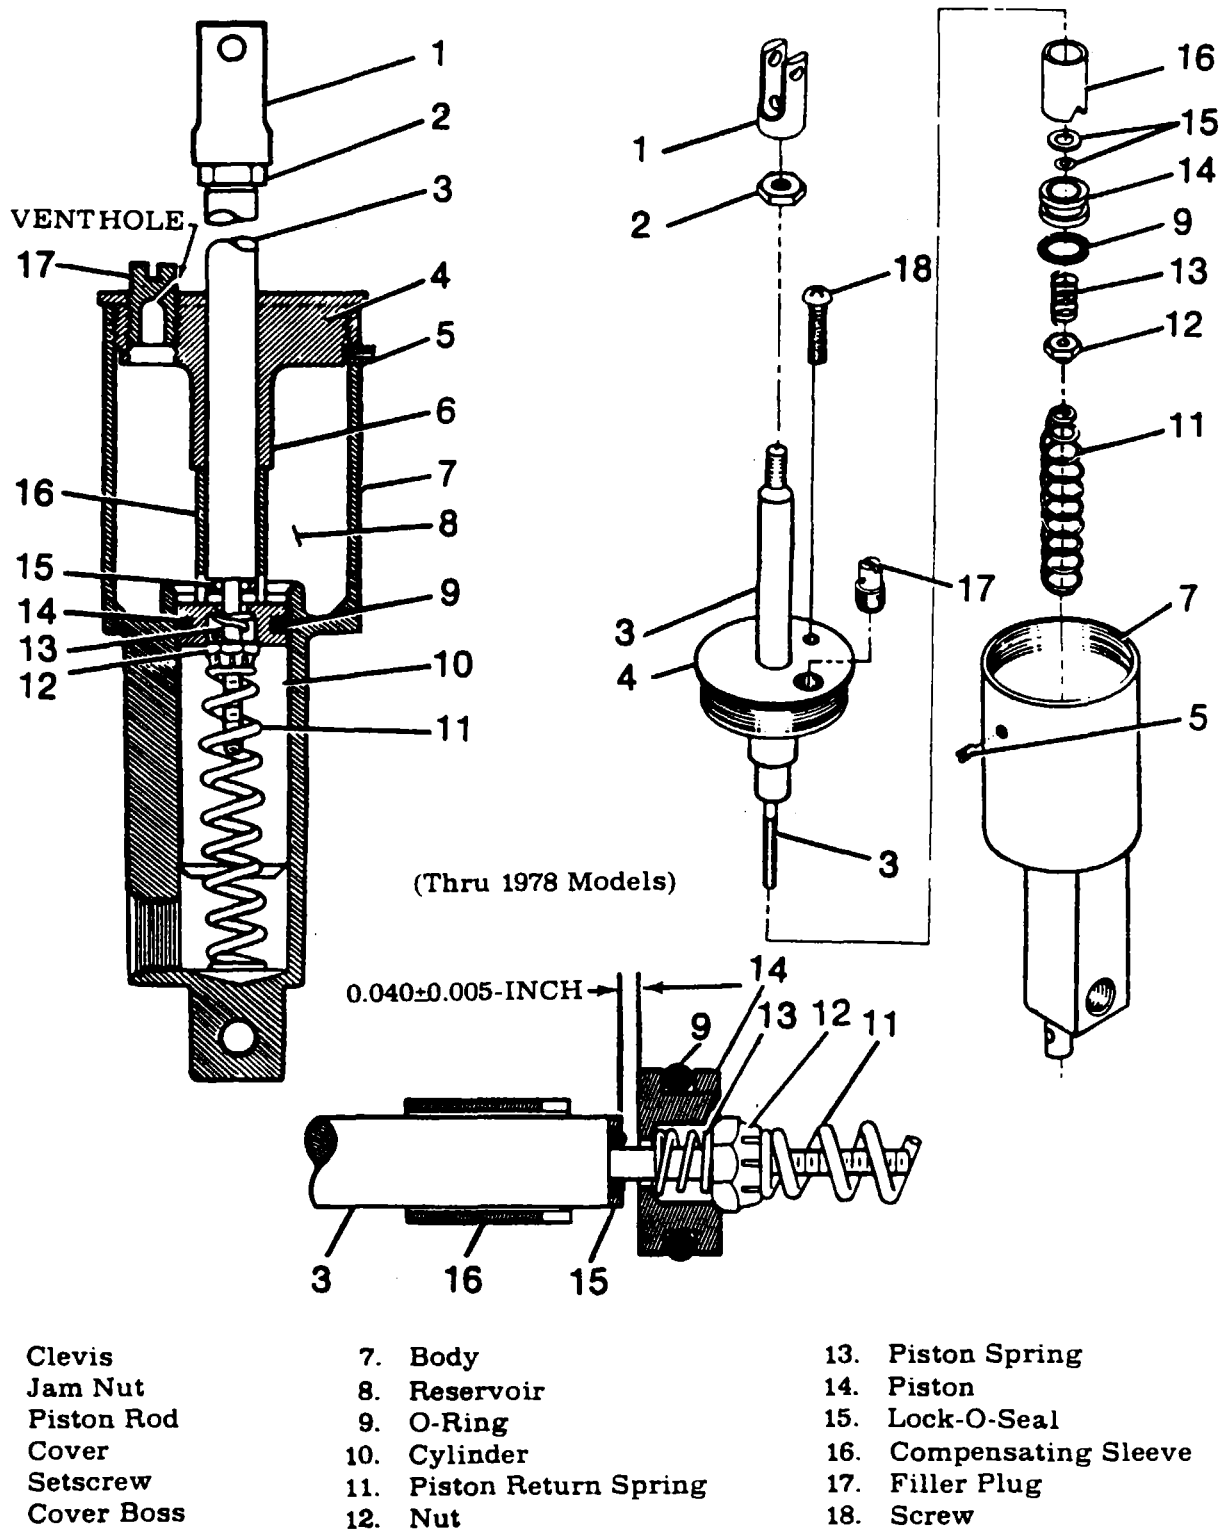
Brake Master Cylinder (Sheet 1 of 2)
